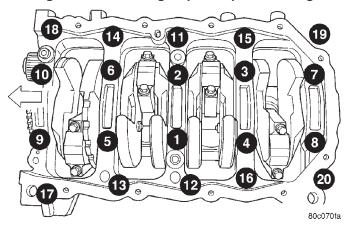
Main Bearing Caps/Bedplate Tightening Sequence
